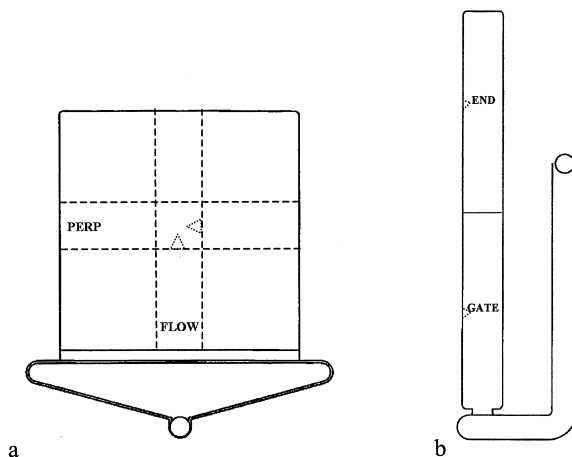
Schematic drawing of (a) injection moulded plate, with a 4 mm nozzle gate and an ISO 294 film gating with a  $1 \times 70$  mm entrance gate, and (b) flexural bar, with a 4 mm nozzle gate and a Z-shaped ASTM D3641 gating with a  $6 \times 3.2$  mm entrance. For both geometries the cutting procedure for FLOW and PERP and GATE and END type of specimens are indicated.
